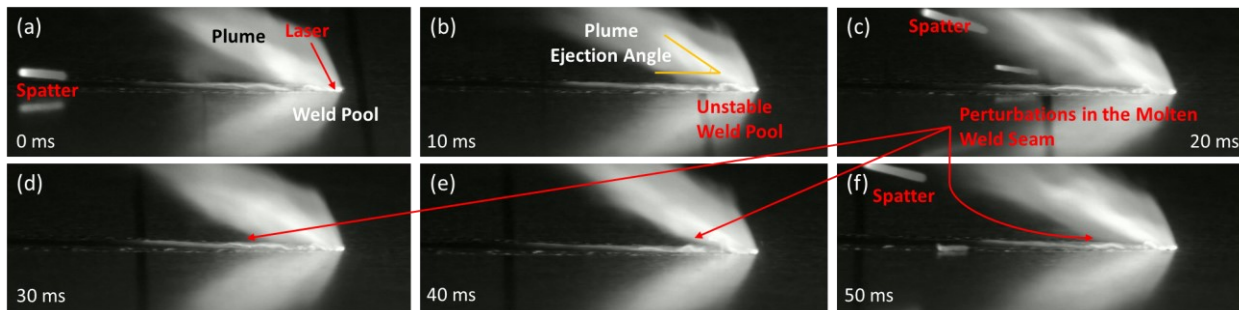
Still images of the welding process using the TBC showing an unstable weld pool leading to perturbations in the molten weld seam and significant spattering which causes defects such as weld humping and high concavity.
